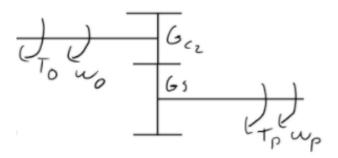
Gear train representing the gear ratio for the engine sprocket and the spur gear
